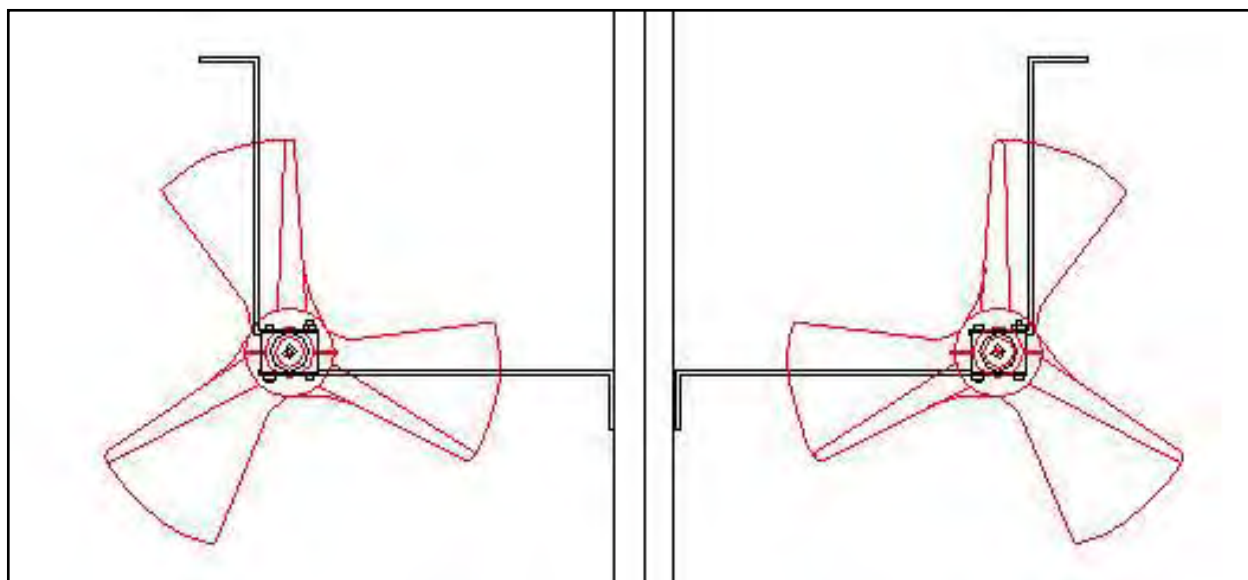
Configuration schematic of the twin propellers, shaft bearings, and struts; stern post in center.
